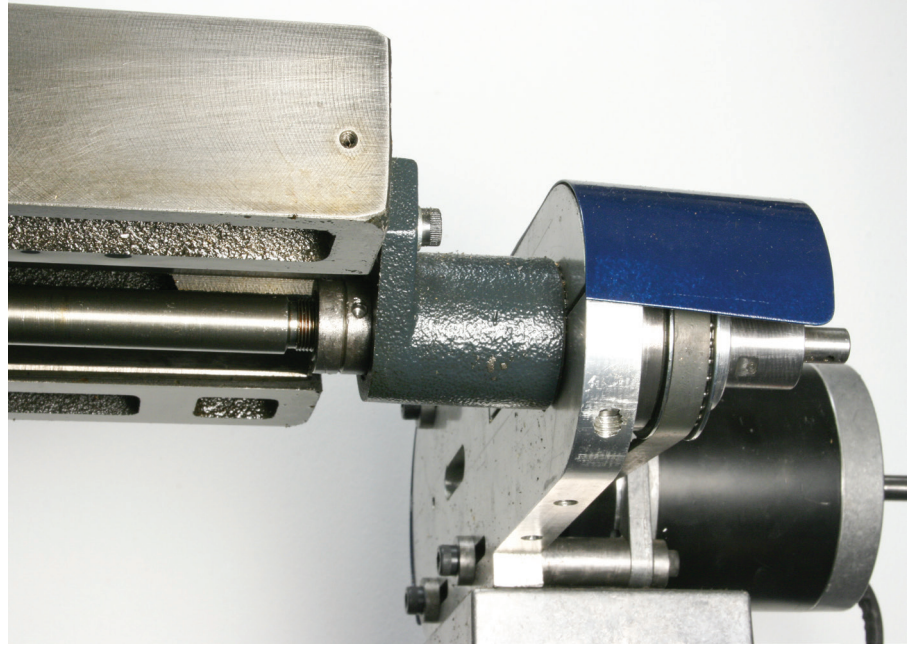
The collars to the left of the shaft support casting can be adjusted to minimise backlash.
